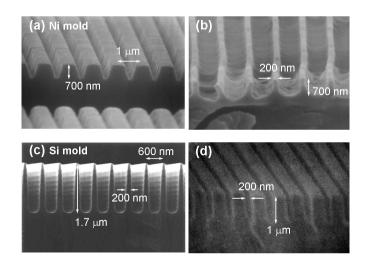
Cross-sectional SEM images of (a) Ni mold with high-aspect-ratio trenches (obtained by FIB machining), (b) replicated PMMA sheet surface with (a) (obtained by brittle fracture), (c) Si mold with high-aspect-ratio blades (obtained by cleavage cutting), (d) imprinted PMMA sheet surface with (c).
